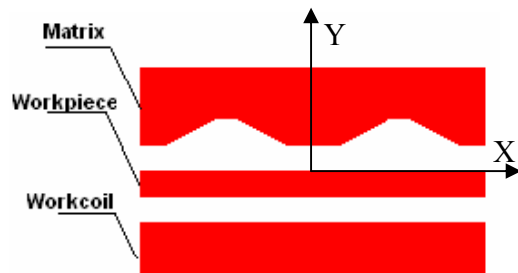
An IEMF system for forming metal sheet without using field-shaper
